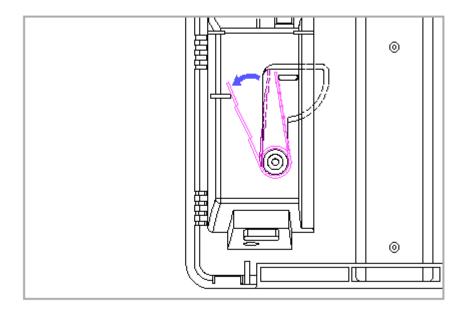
Installing the Horizontal Guide (Eject Switch Side)
